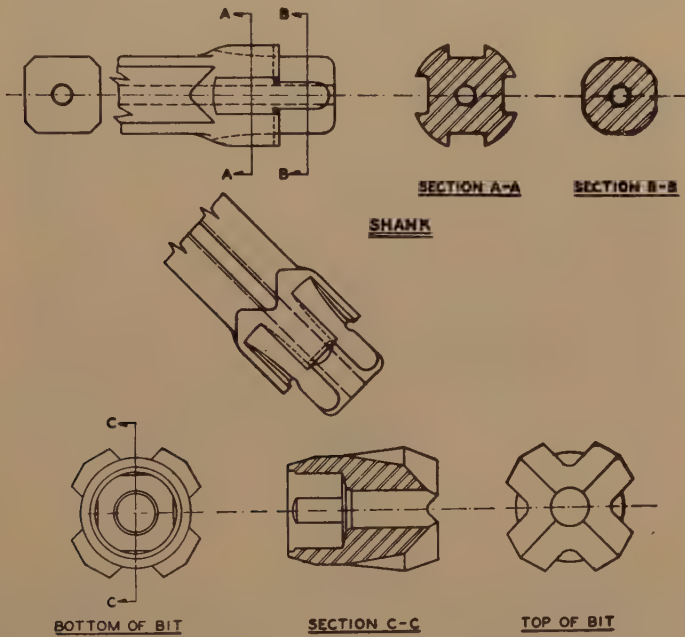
LIDDICOAT TYPE B DETACHABLE BIT AND BIT CONNECTION.
